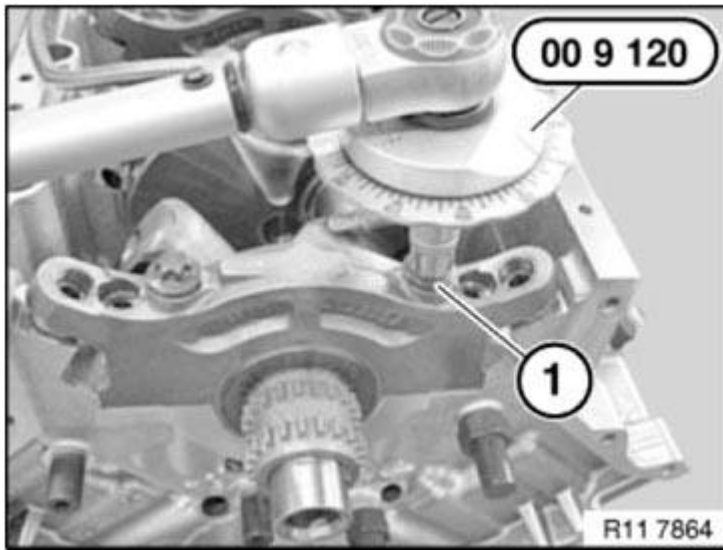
Tightening Collar Bolts (M11) Of Main Bearing Caps With Special Tool 00 9 120 With Angle Of Rotation
